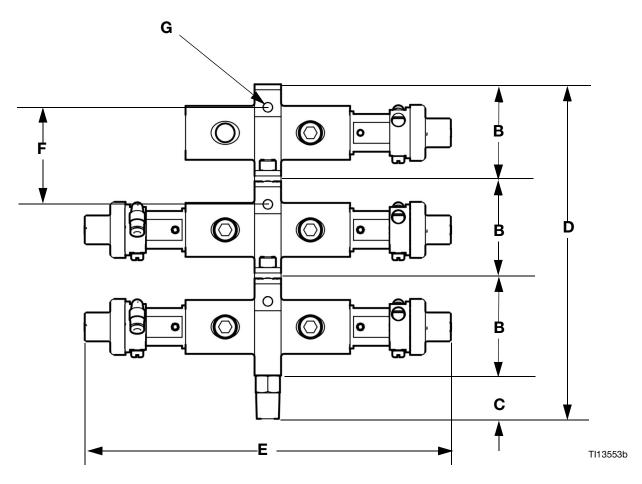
Low Pressure Valve Stack Dimensions - Series B
